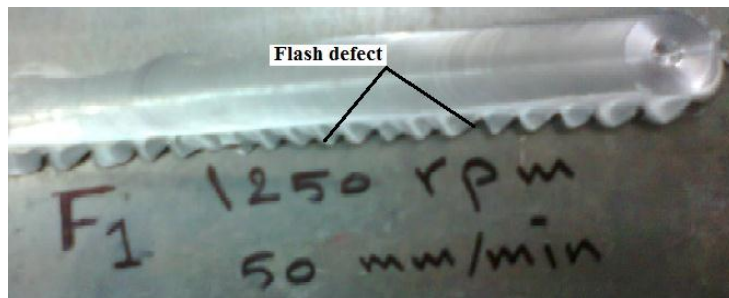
Flash defects at 1250 rpm, 50 mm/min.
